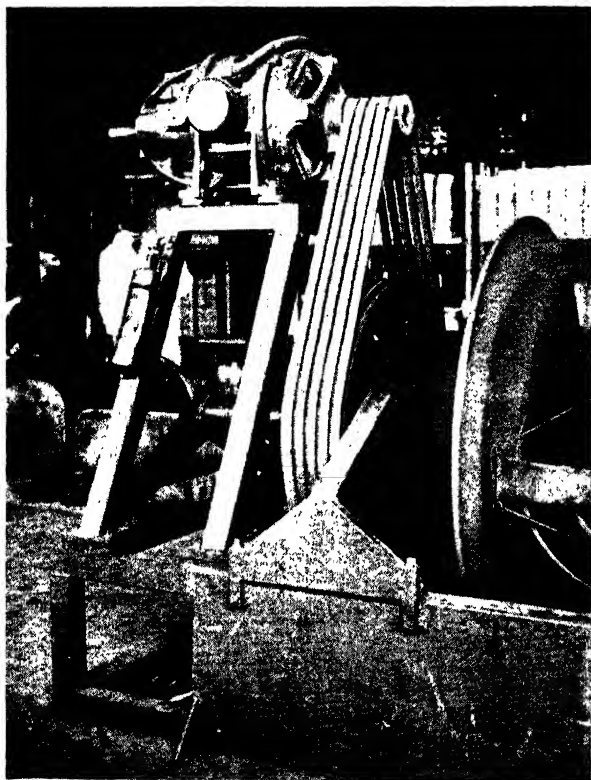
This electric motor mounting bracket was made on the job to fit the special need. Premachined bolt blocks and short lengths of scrap plate and box sections were quickly fused into a rigid and efficient mounting base. (Courtesy of R. G. LeTourneau, Inc.)
